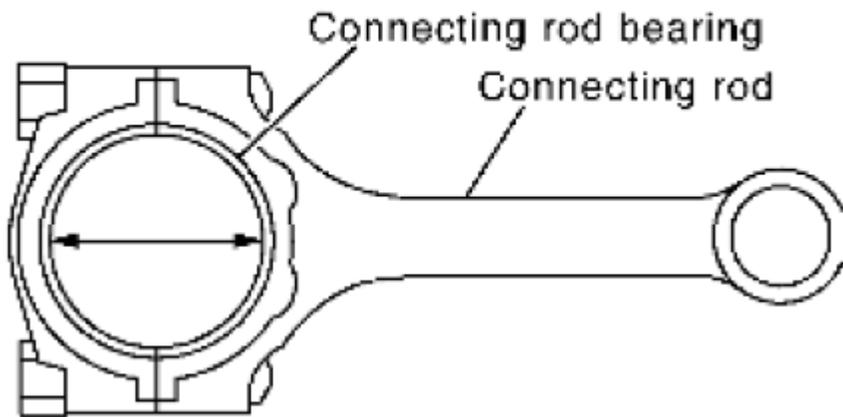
Identifying Inner Diameter Of Connecting Rod Bearing
